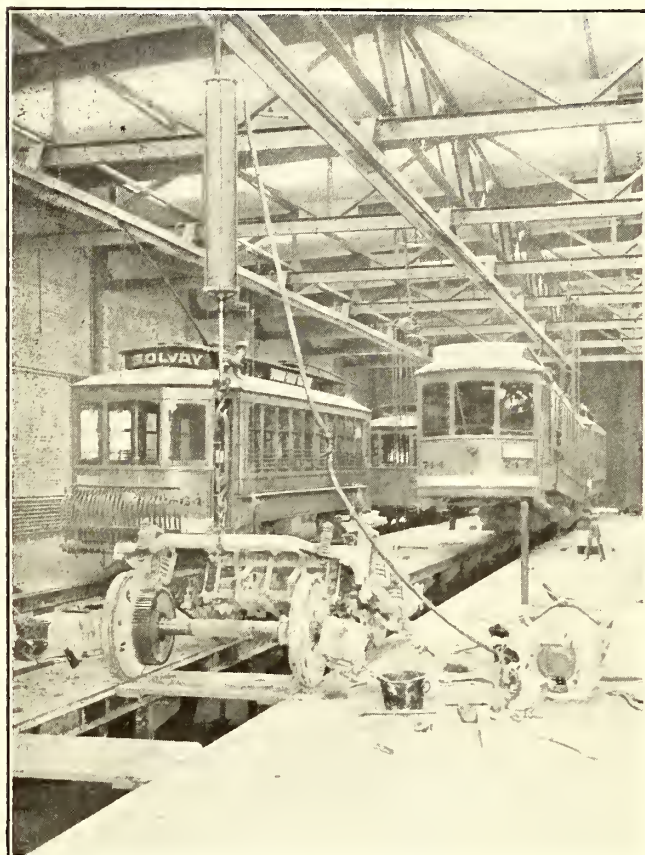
Syracuse Shops—Air Hoist and Car Sling on Light Overhaul Tracks
